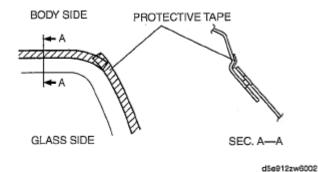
Identifying Protective Tape On Edge Of Body Courtesy of MAZDA MOTORS CORP.
